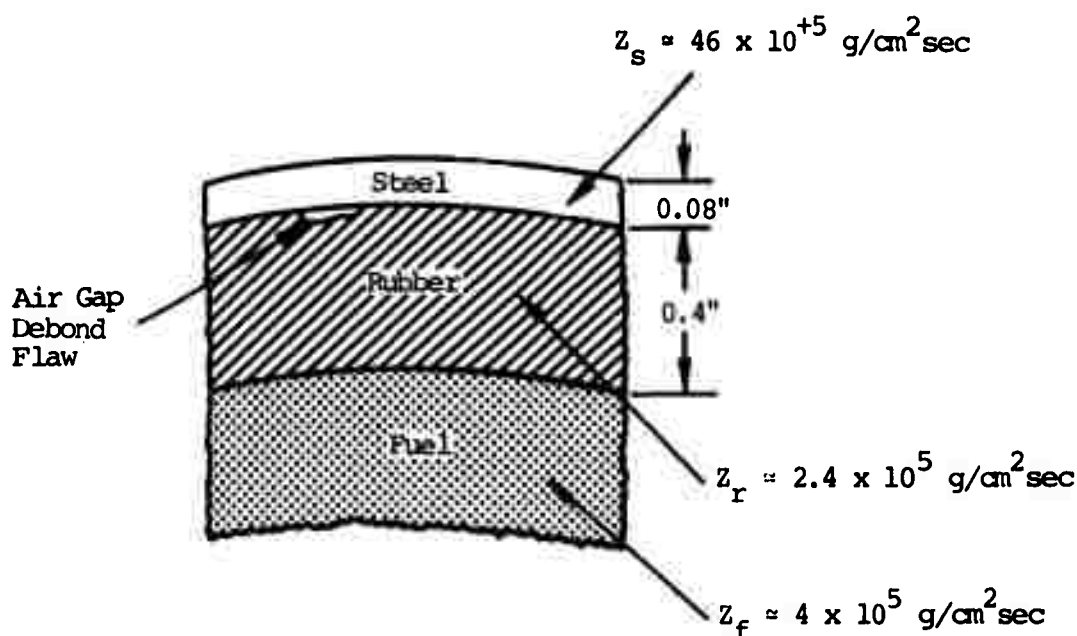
SOLID ROCKET MOTOR SAMPLE CROSS-SECTIONAL GEOMETRY
